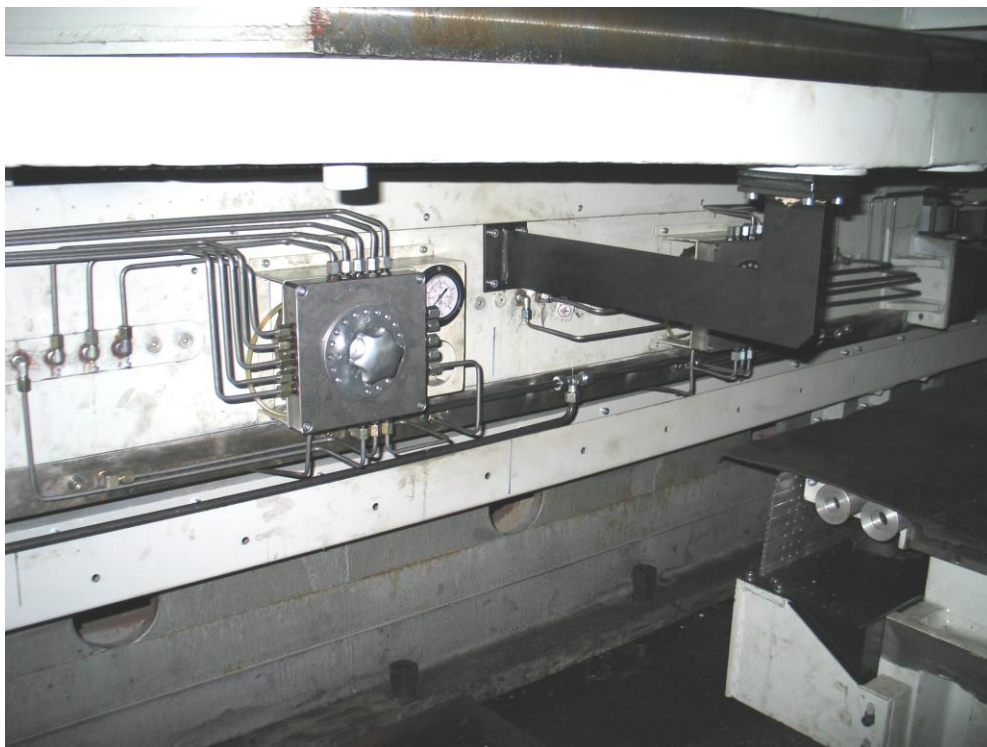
The DRK units (4 pcs) making the hydrostatic pressure / flow adjustment
